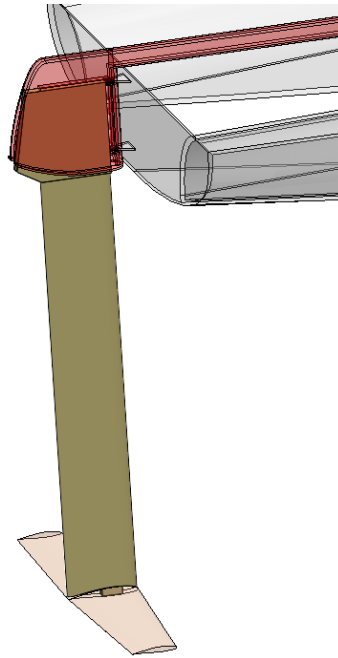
rudder strut and foil assembly installed to the rudder stock (red).
